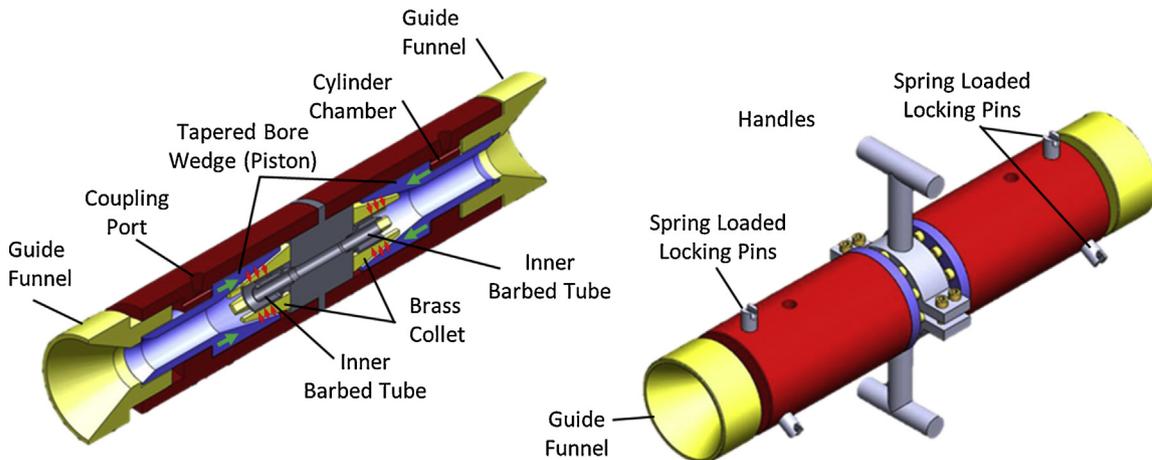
Solid model of final design for the “Hose Splicer” an ROV operated hydraulic hose-fitting crimper. The brass guide funnel is attached to the piston that pushed on the collet segments, and when it moves fully forward, a spring loaded locking pin maintains its position even if hydraulic pressure is lost. On the right the central region has been lengthened to provide a region for grab handles for the ROV or top surface technicians.
